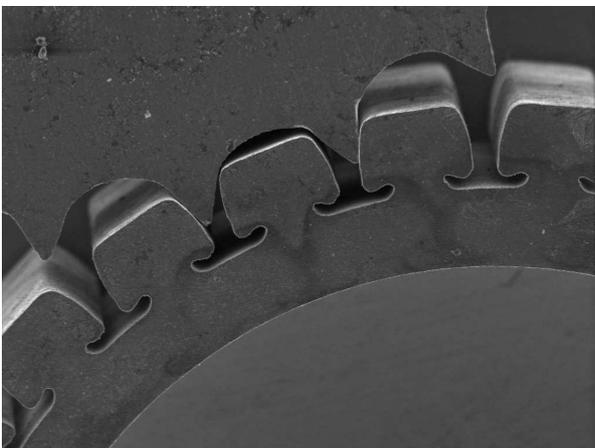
Structural details (P-tooth profile) of an assembled Micro Harmonic Drive gear rack (SEM).
